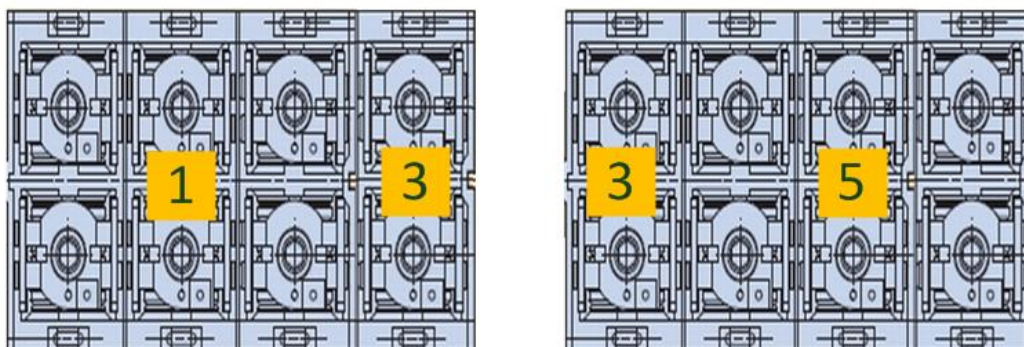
Overview of terminal points for TN-C systems and connection terminals
